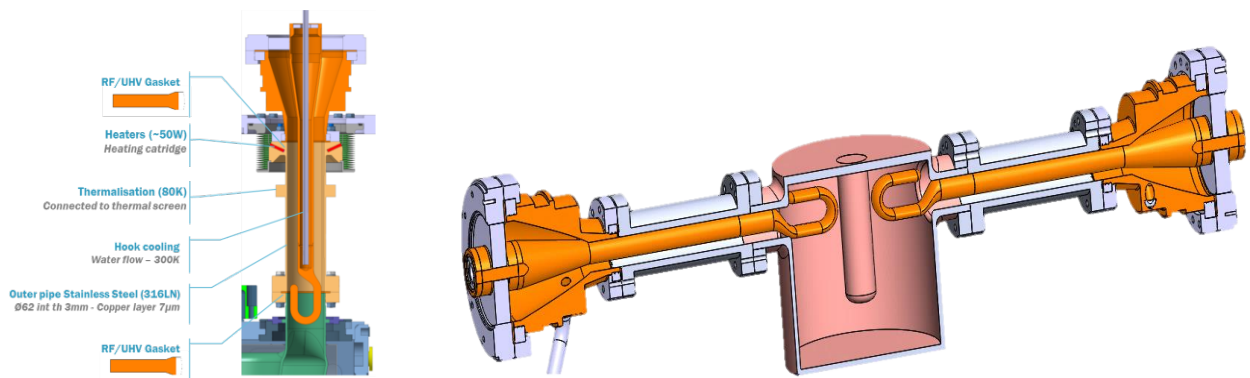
(left) Input coupler assembly; (right) quarter wave FPC test box for RF conditioning.
